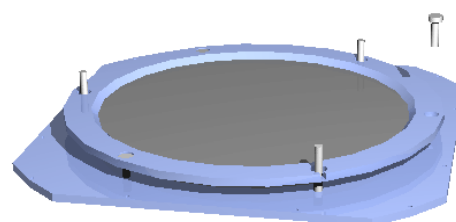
Assembly of MCP-stack - Stage 3-2 (DLD120 and HEX120)
